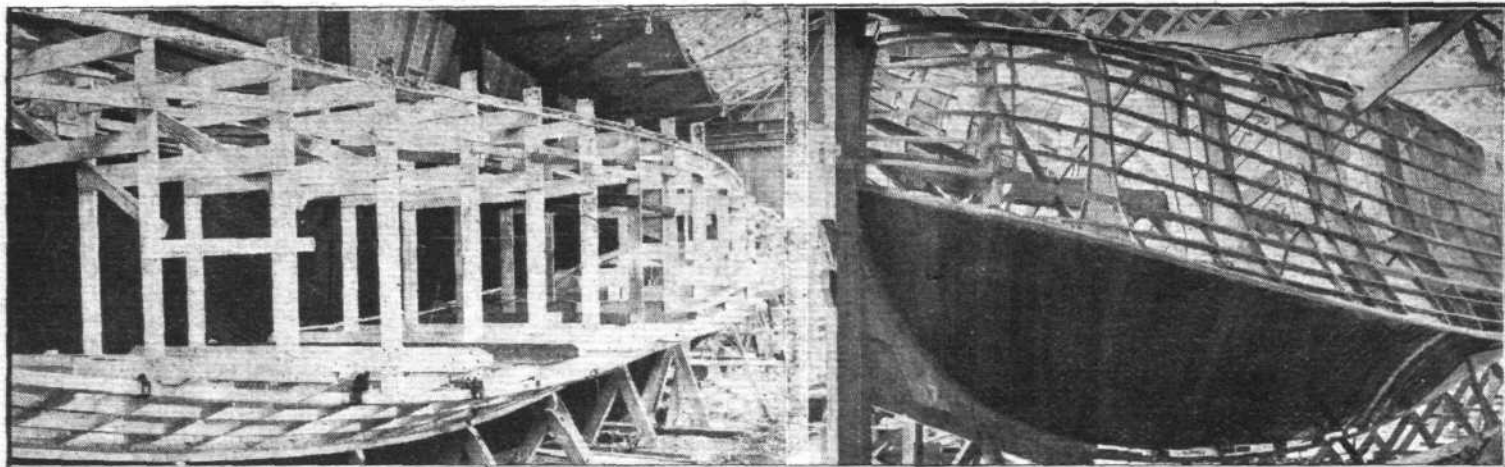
F boat, showing wrong method of holding moulds together.
